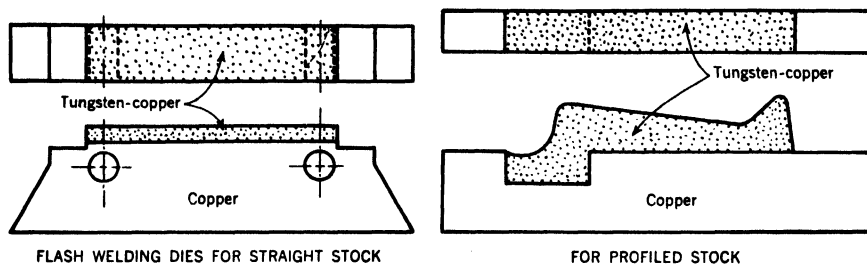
Schematic drawing of tungsten-copper facings of two typical flash welding dies designed to withstand heavy pressure (according to Hensel, Larsen, and Swazy<sup>27</sup>).
